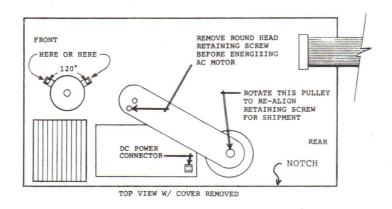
STEPPER LOCK & SET SCREW PLACEMENT
